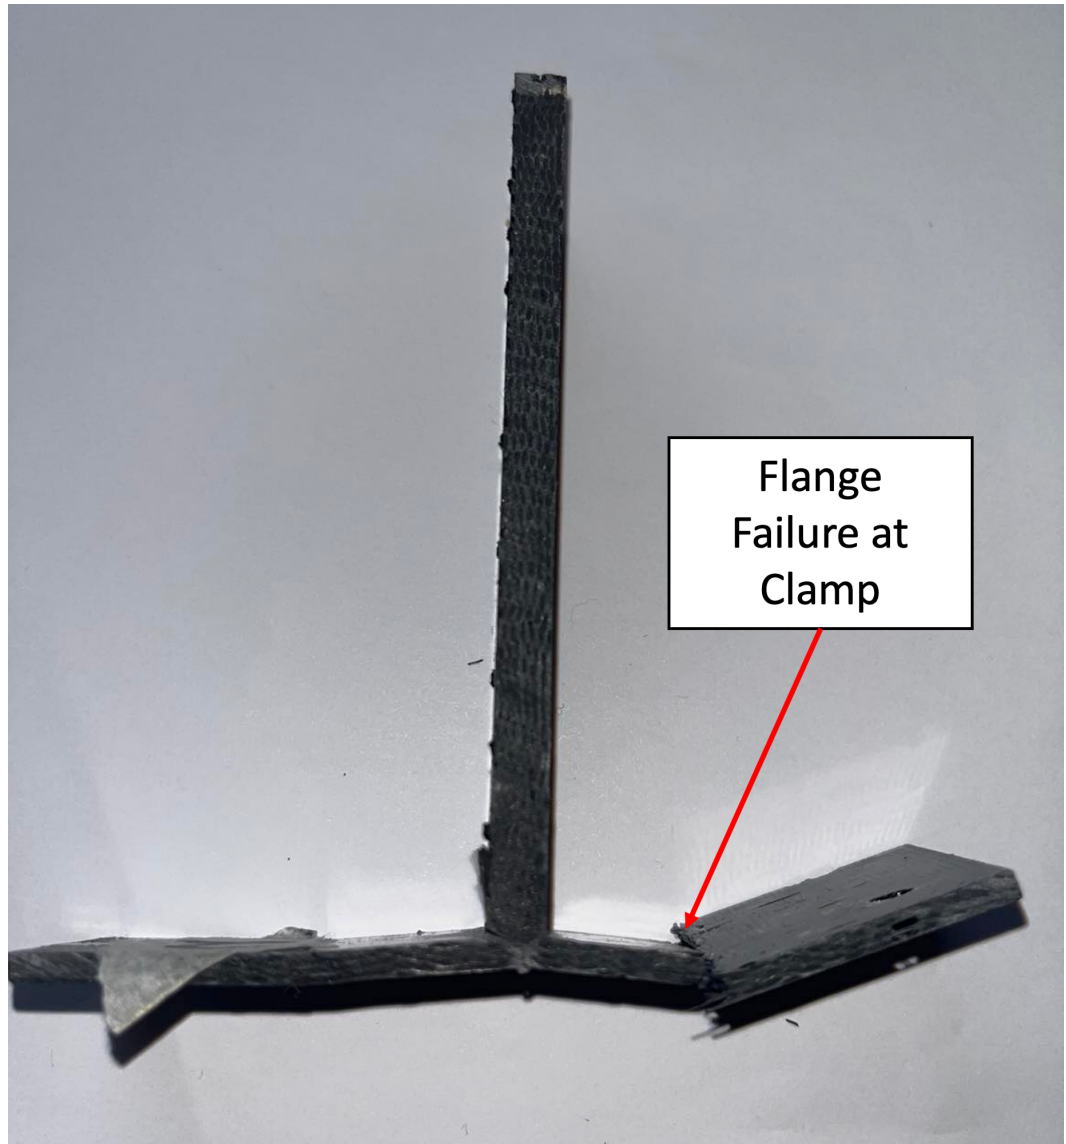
T-joint specimen 1, coupon 2 after tensile pull-off test. Coupon 2 showing failure at flange.
